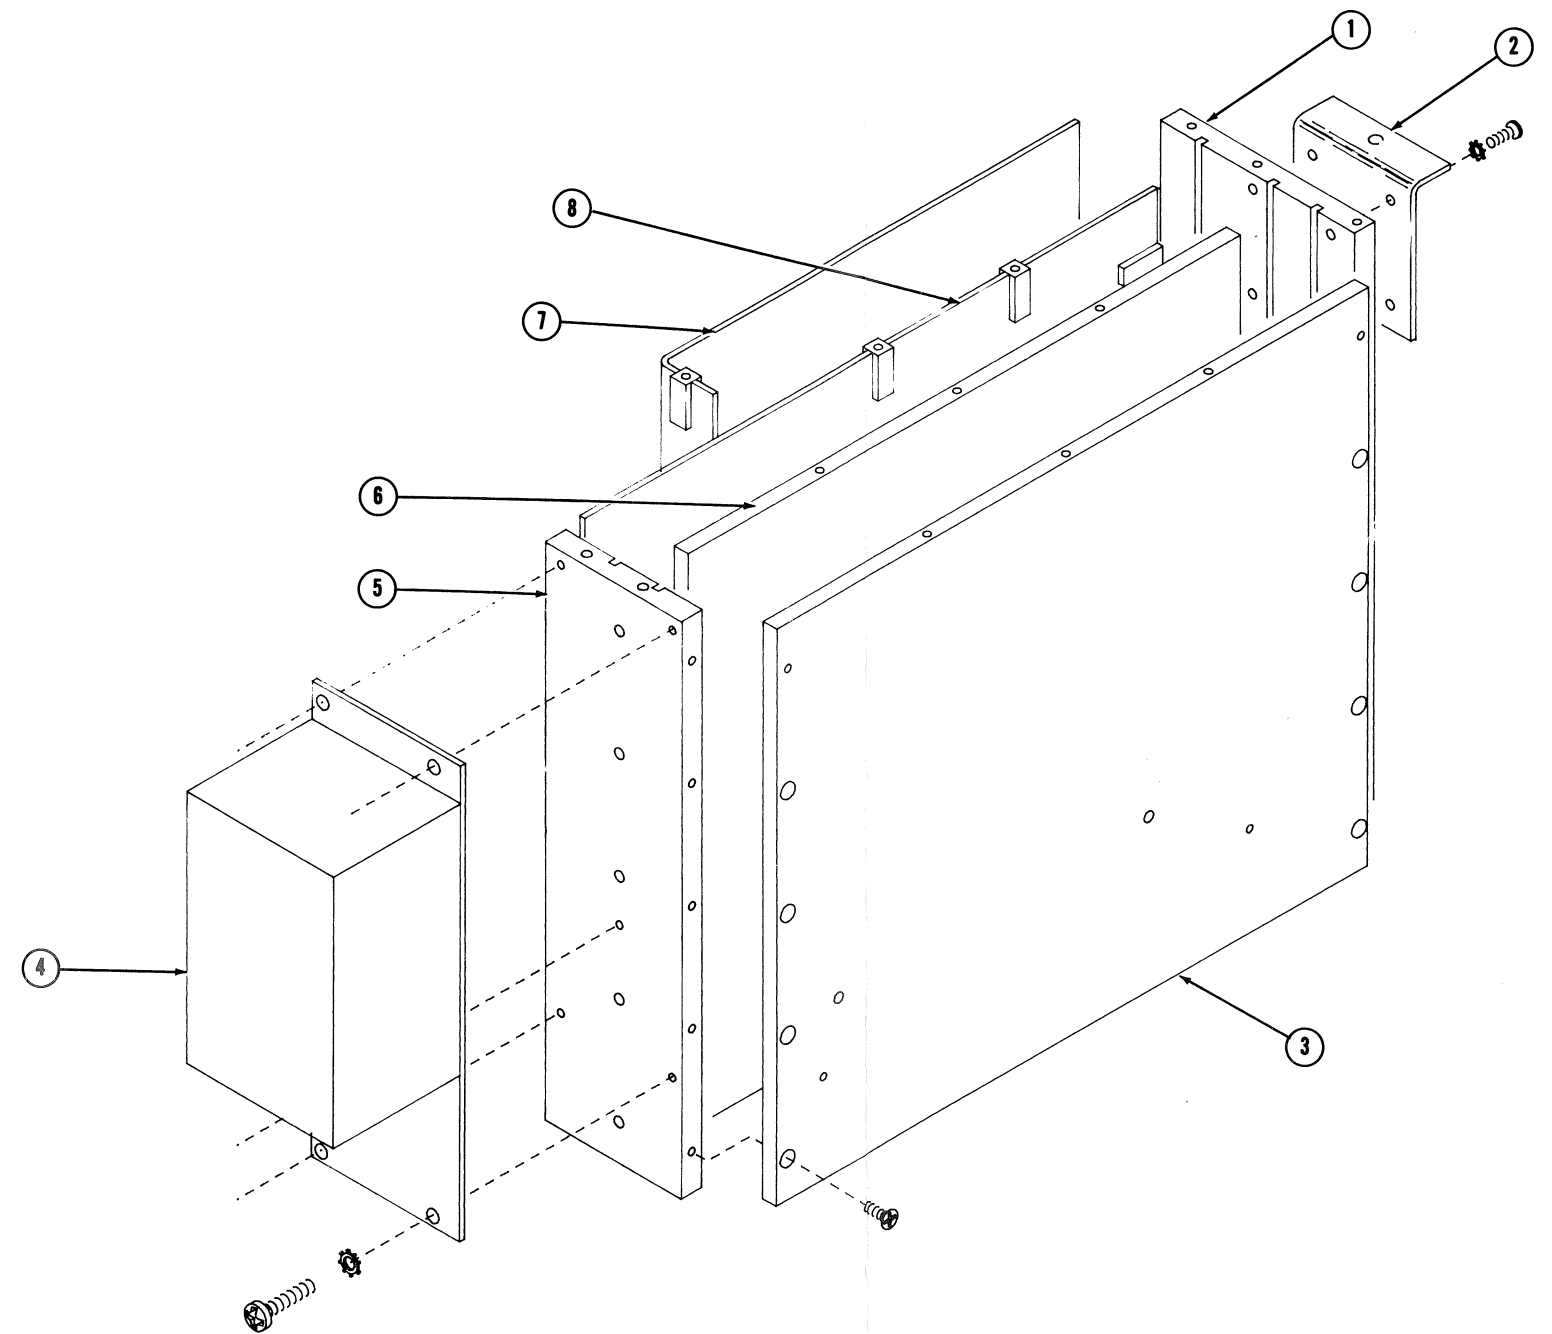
Tracking Generator/Oscillator Assembly.
